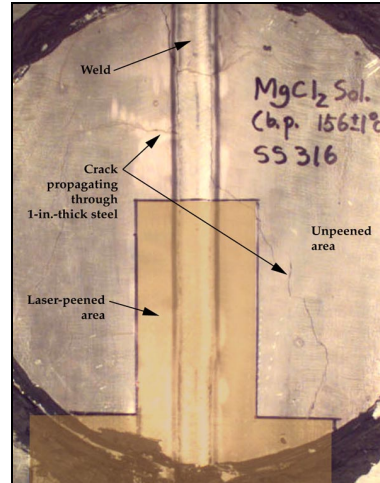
Laser peening significantly reduces stress corrosion cracking in welded 316 stainless steel.
